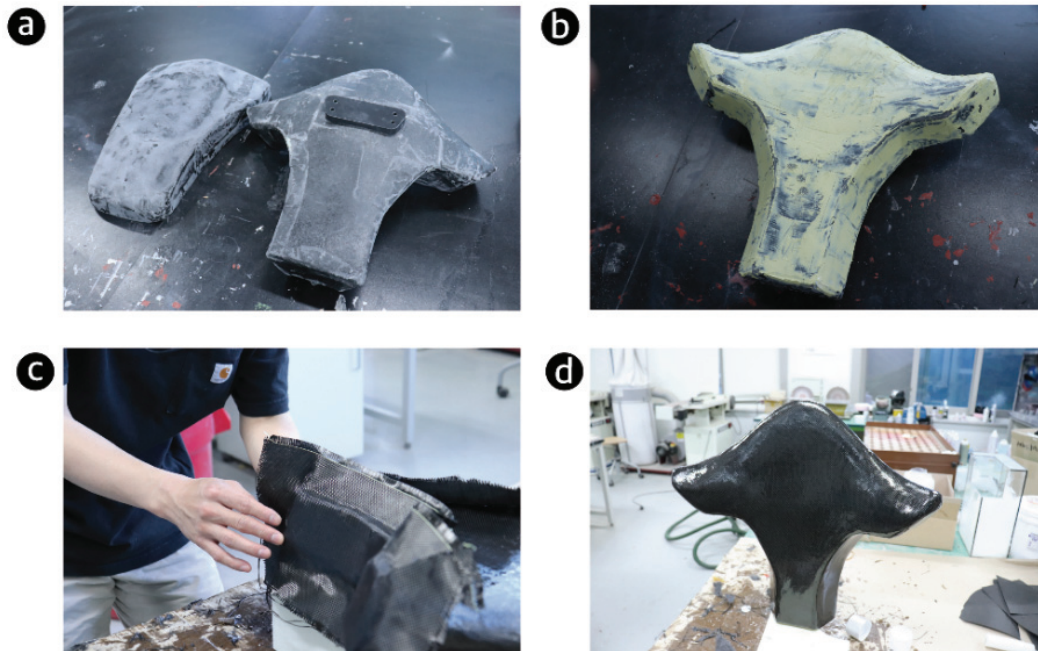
The process of making seat frame, (a) prepare mold, (b) spray resin, (c) laying carbon fiber, (d) finishing parts
